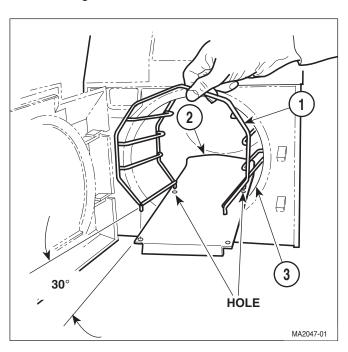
Wire Tray Rack and Tray Plate Removal / Installation
